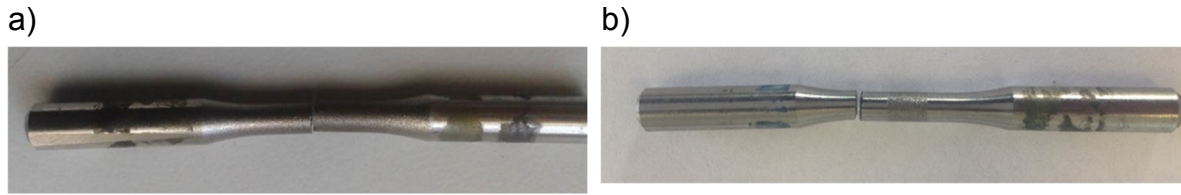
Fracture location after fatigue test for a) AW SP and b) AW SP on weld zone.
